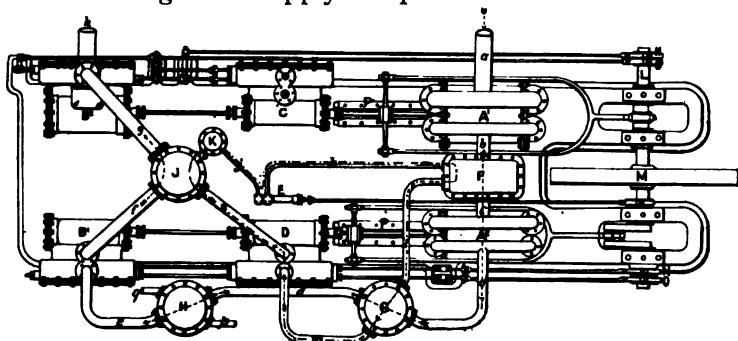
REFERENCE TO COMBINED AIR AND ETHER MACHINE.
